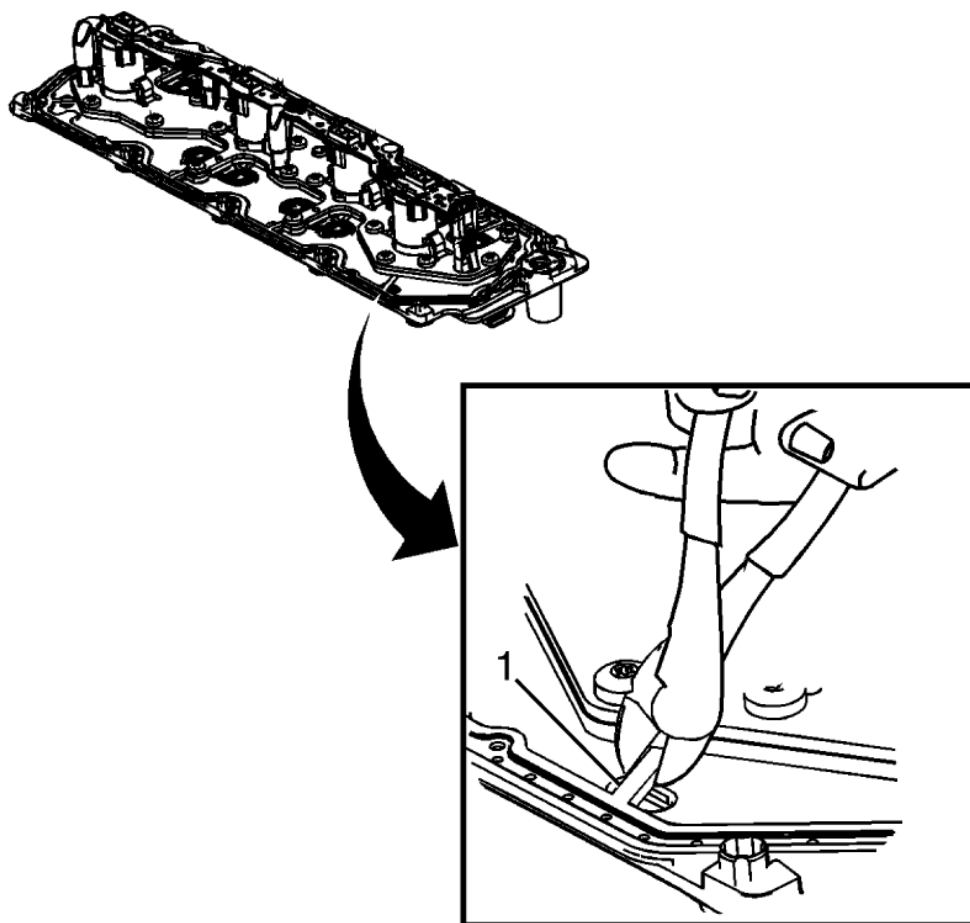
View Of Cutting VLOM Outer Gasket Retaining Straps
